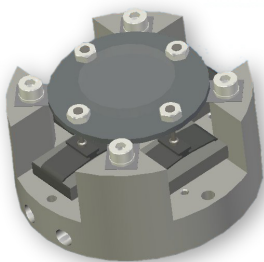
CAD view of the Double Tilt Translator DTT35XS
